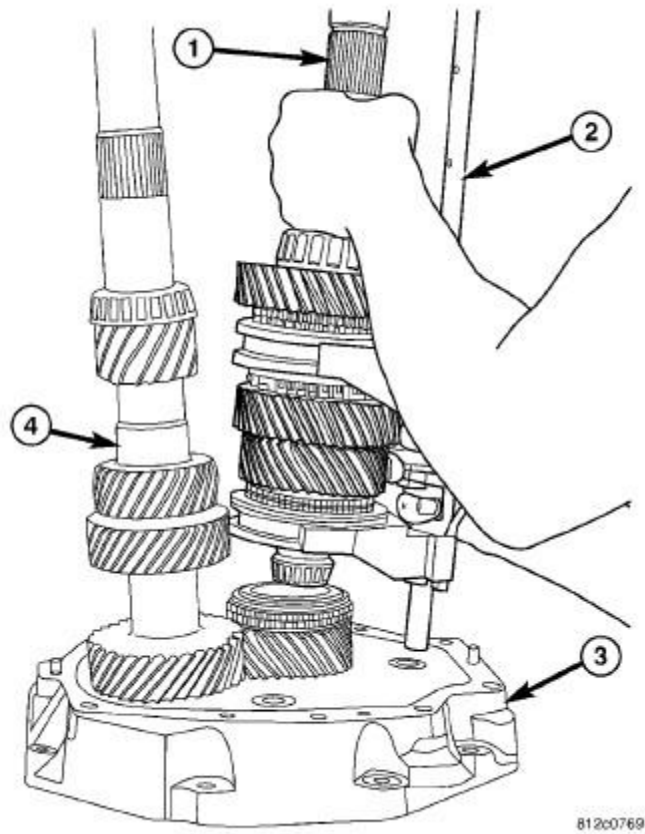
Removing/Installing Reverse Shaft Rail Assembly
